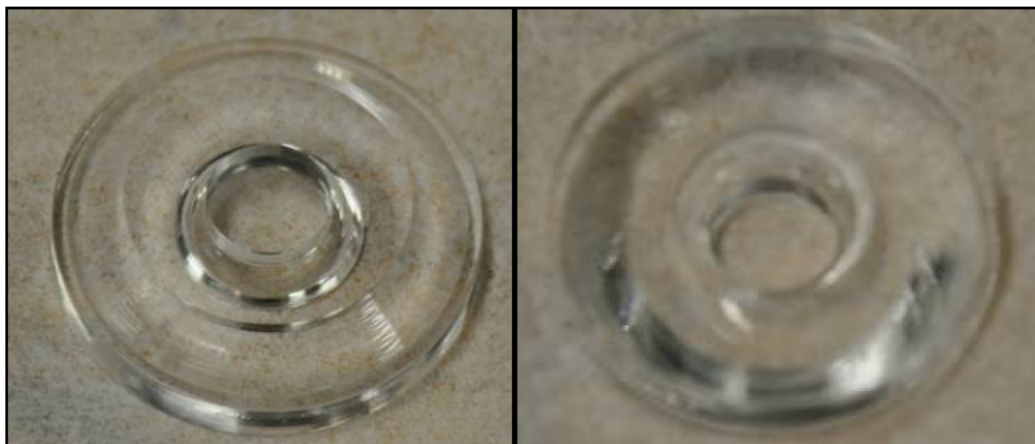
Photographs showing the top and bottom sides of the quartz bowl.
